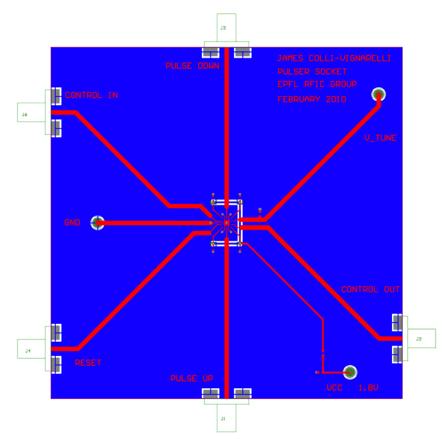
The PCB of the testing board for Prototype nº 1.
